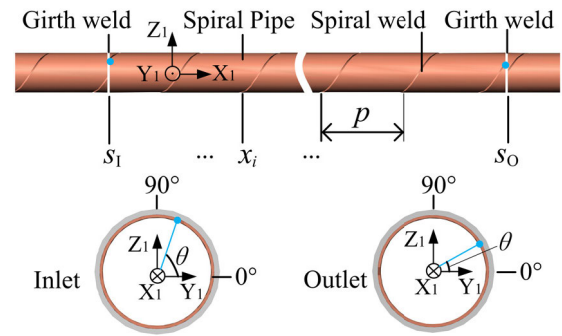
Schematic of detection principle of spiral-girth weld crosspoint.
